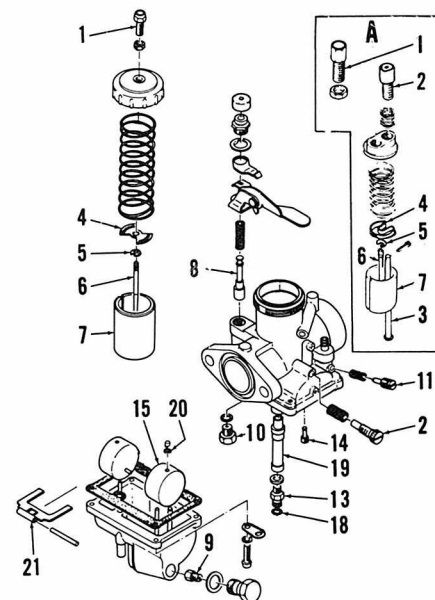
Exploded view of carburetor. Inset (A) is idle speed adjustment used on early DT-1 units.
